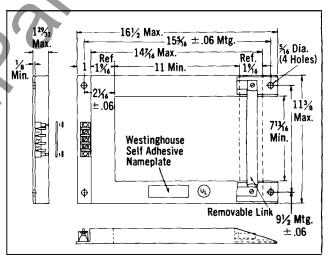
Mounting Dimension for S# 1257C88G01, G02
